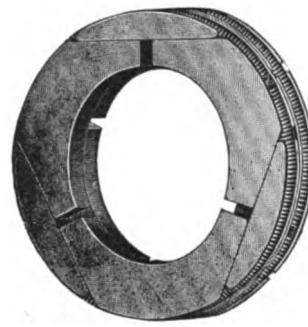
Type No. 29 rings will work on steam, air, gaseous ammonia, or gas rods. We recommend this ring for all vertical rods, and for horizontal rods up to 12-in. diameter
